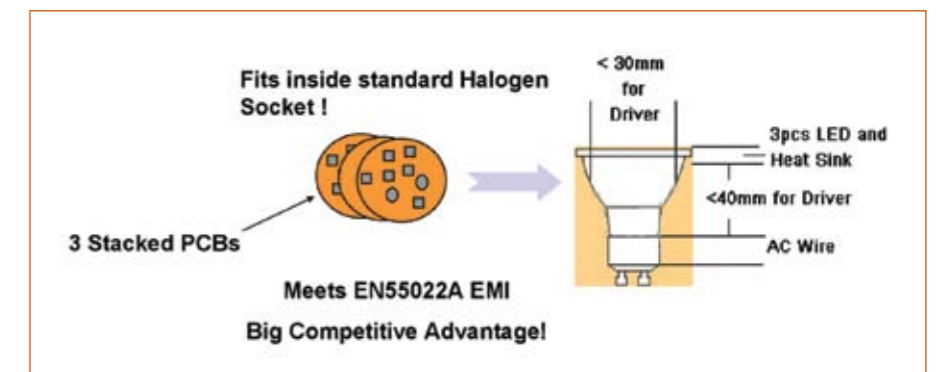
Drawing showing PCB and Halogen lamp base dimensioned side view Title "Mechanical Packaging Challenge".
